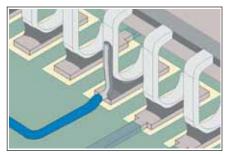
Acceptable* Wire soldered parallel to component lead.
